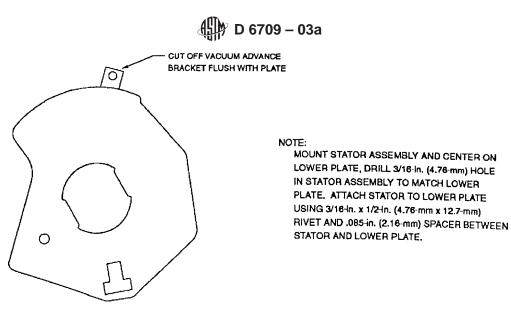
Modified Ford Distributor-Lower Plate Assembly
